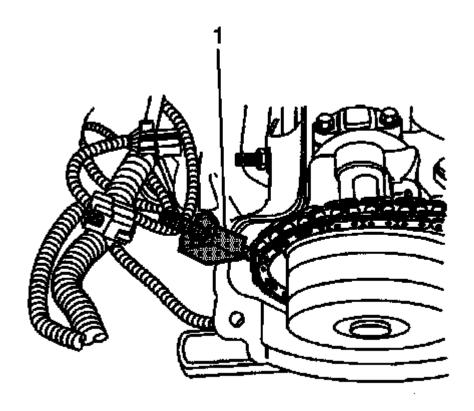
Camshaft Position Exhaust Actuator & Bolt Courtesy of GENERAL MOTORS COMPANY
